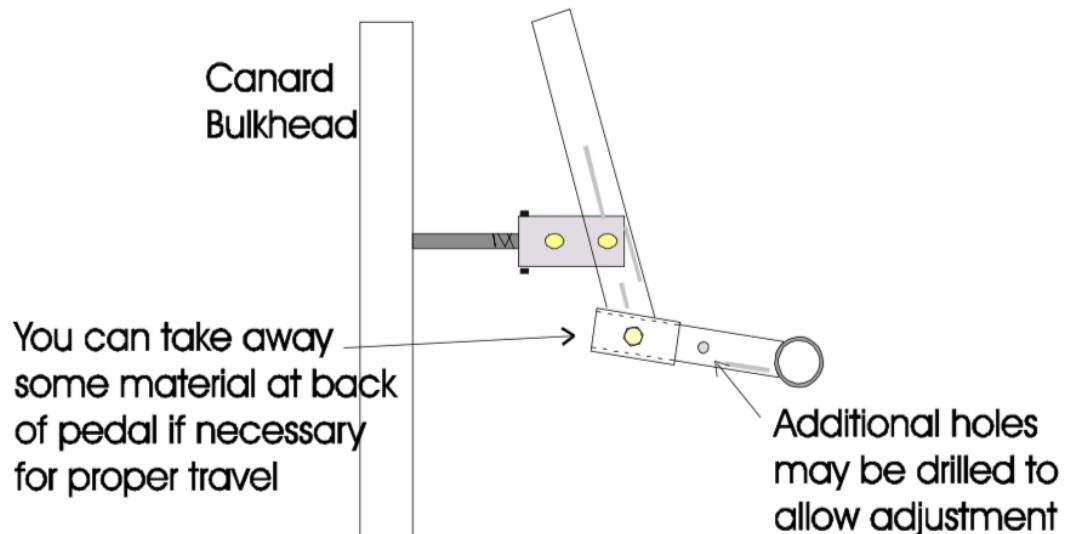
Rudder Pedal to Pedal Arm Assembly
